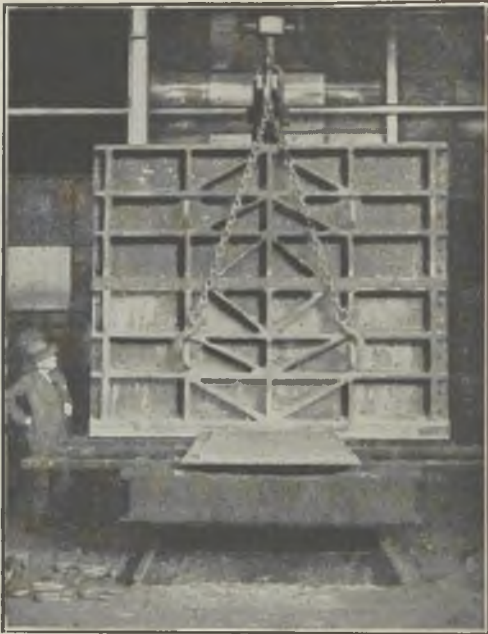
SHOWS TYPE OF MOULDING BOX USED.
